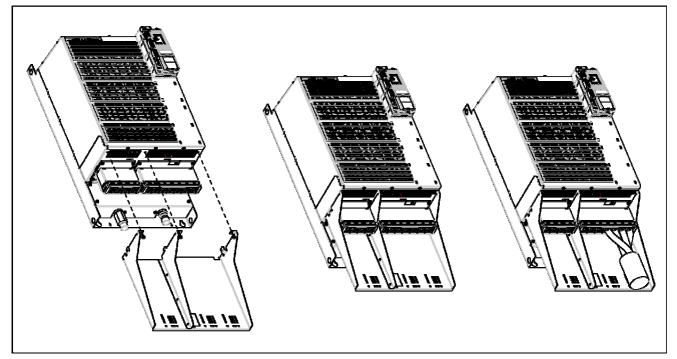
Mounting a Screening Kit on a Liquid Cooled Power Module PM340, frame size FSF
